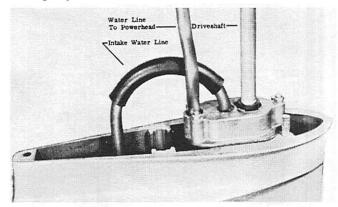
Water Pump Cover Assembly Mounted with Waterlines Installed
